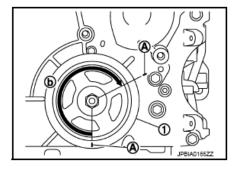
Rotating Crankshaft 240 Degrees Clockwise Courtesy of NISSAN NORTH AMERICA, INC.
